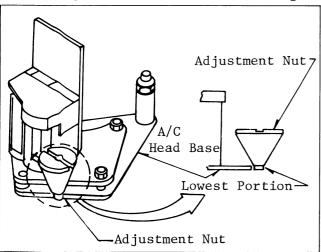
Horizontal Position Adjustment of A/C Head-(1)
